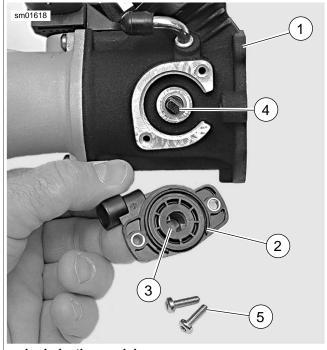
Throttle Position Sensor (TPS) Removal: XL Models
